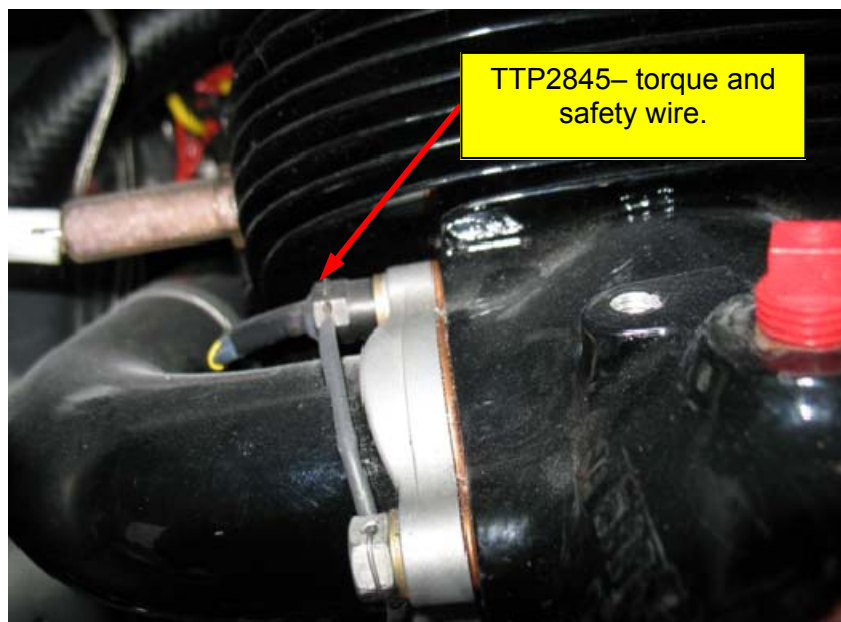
Each cylinder assembly, install one TTP2845- in place of intake bolt.
